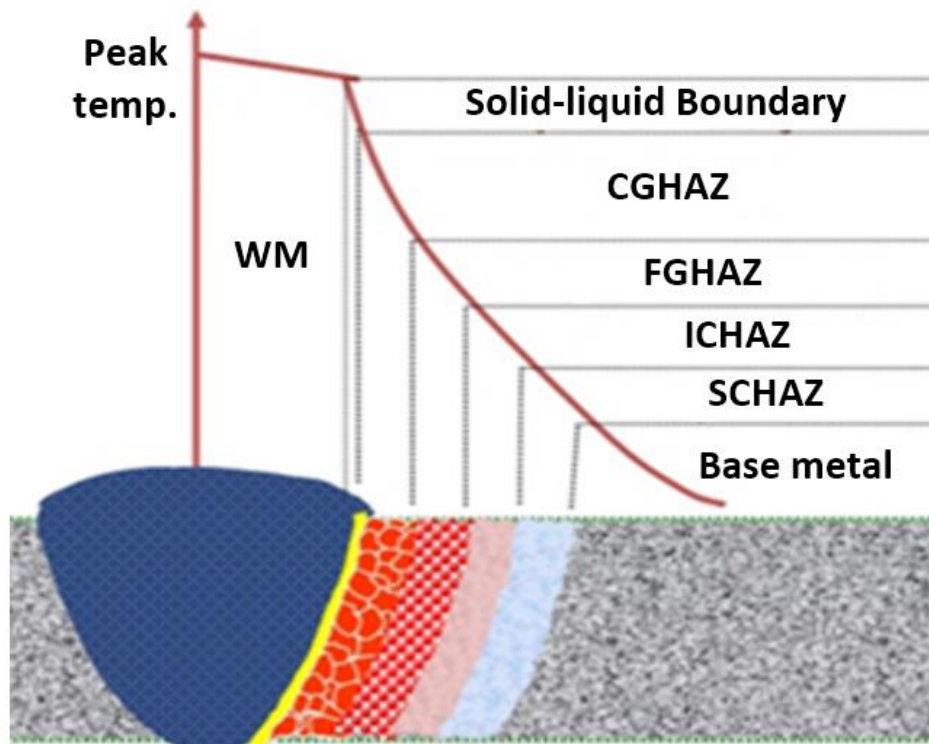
Schematic diagram showing HAZ formed when single-pass welding
